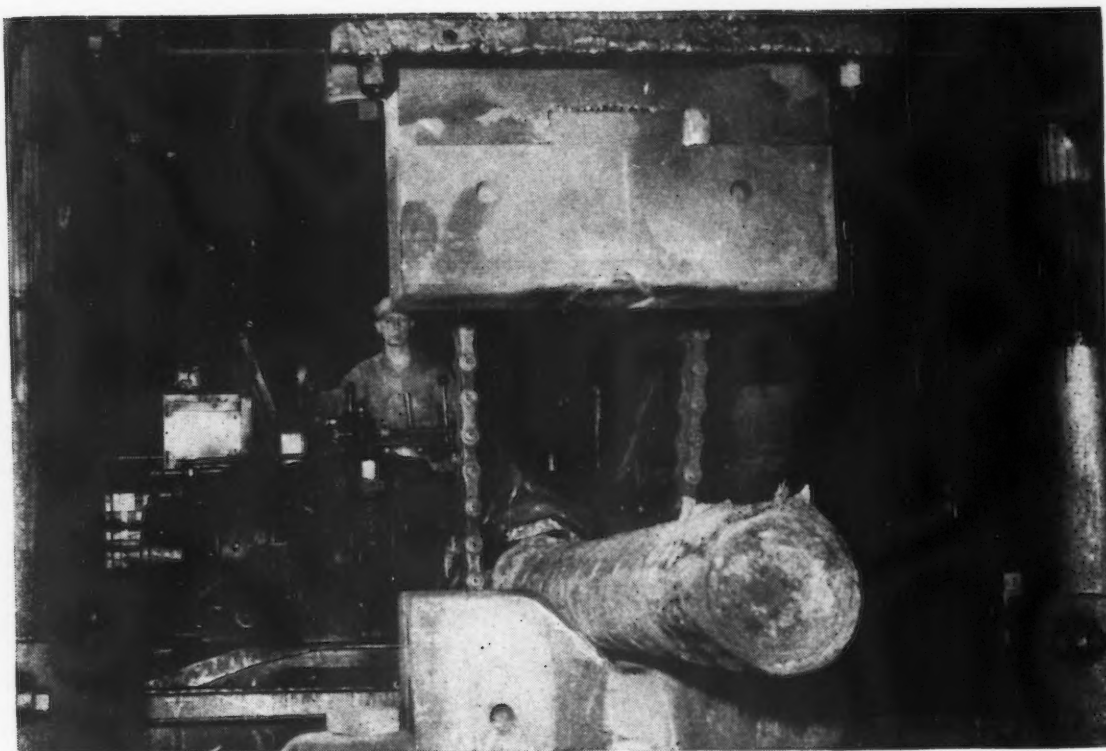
The octagon is worked to a smooth forged round of the desired size and subsequently rough machined to prescribed tolerances.
